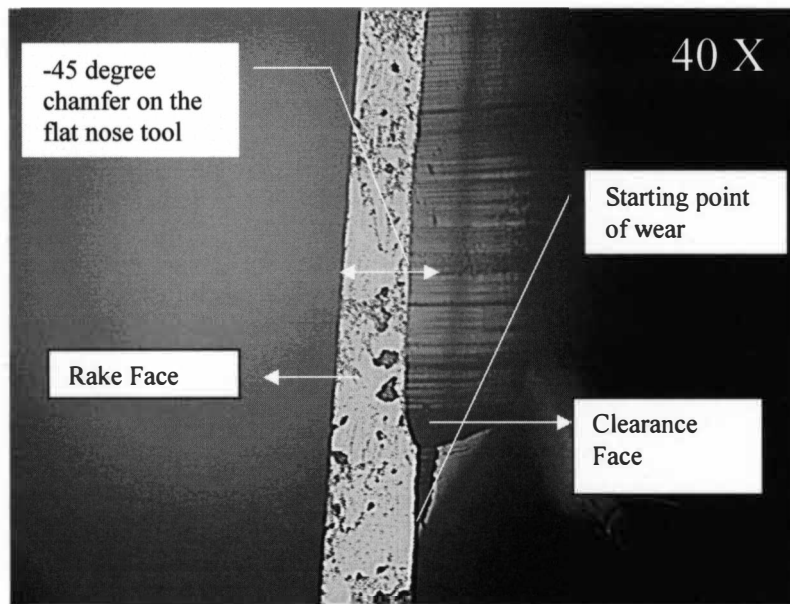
Optical microscope image of tool wear, the tool is at 45 deg to the microscope's lens, looking perpendicular to the rake face (Chardon Tool)
